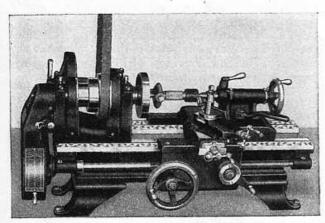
Threading a Master Thread Gauge on the 9-inch South Bend Junior Lathe
